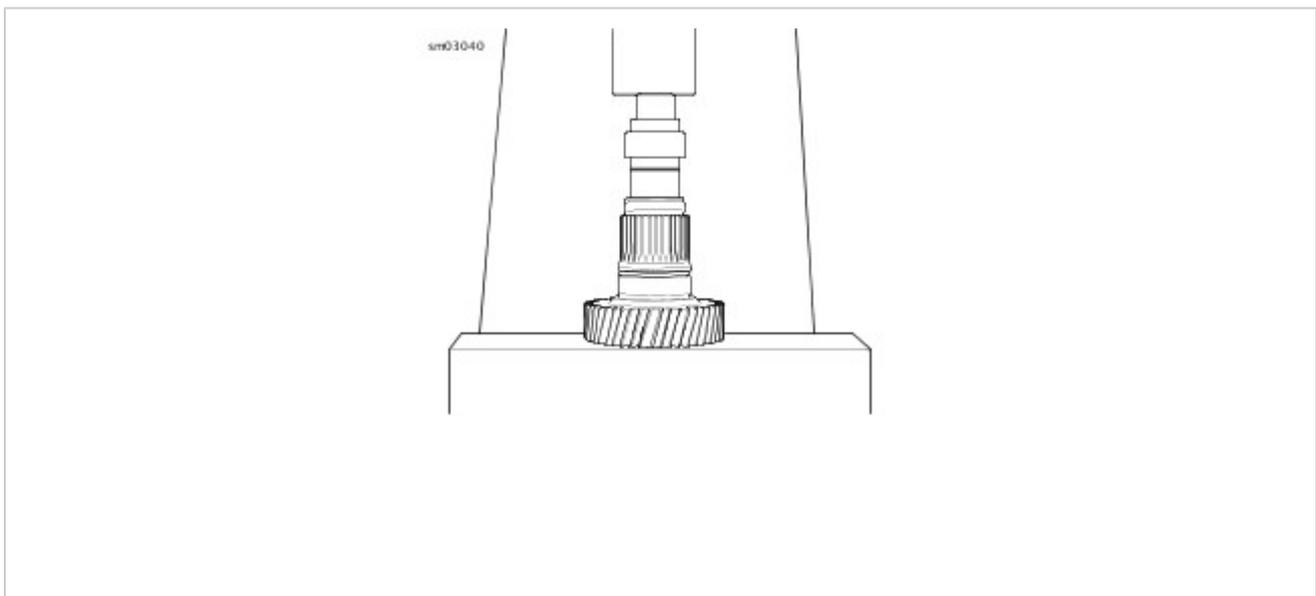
Installing Outer Needle Bearing in Main Drive Gear
